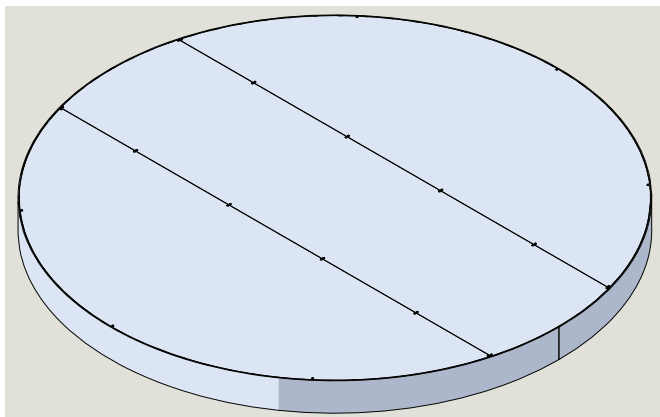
3 piece canopy assembly, top view, covers removed
